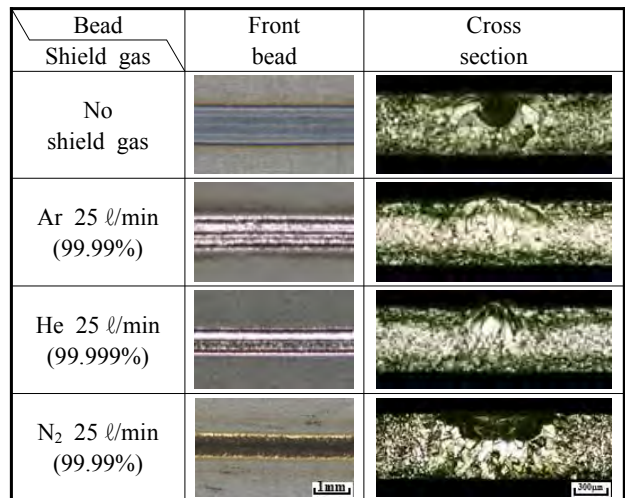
Various bead shapes with kind of shield gas in bead welding (fd=0 mm, PL=1 kW, v=8 m/min)
